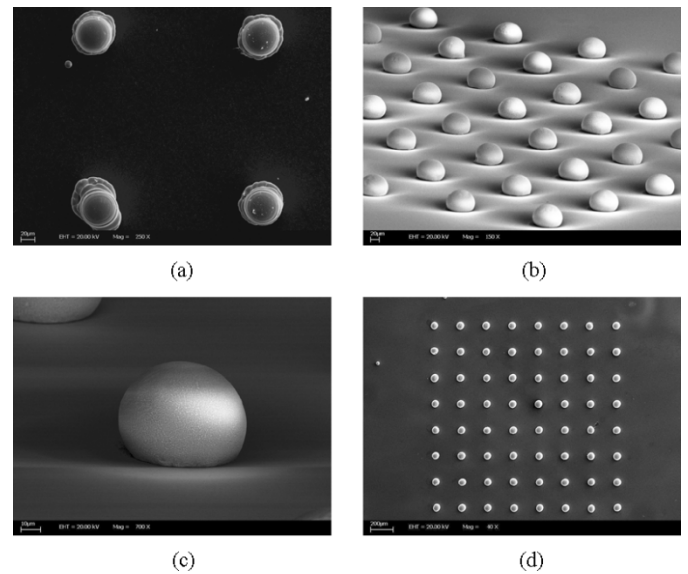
SEM images of solder droplets and solder bumps. (a) Solder droplet just after jetting. (b) Reflowed solder bumps ( $\times 150$ ). (c) Reflowed solder bump ( $\times 700$ ). (d) Top view of arrayed jetted solder bumps ( $\times 40$ ).
